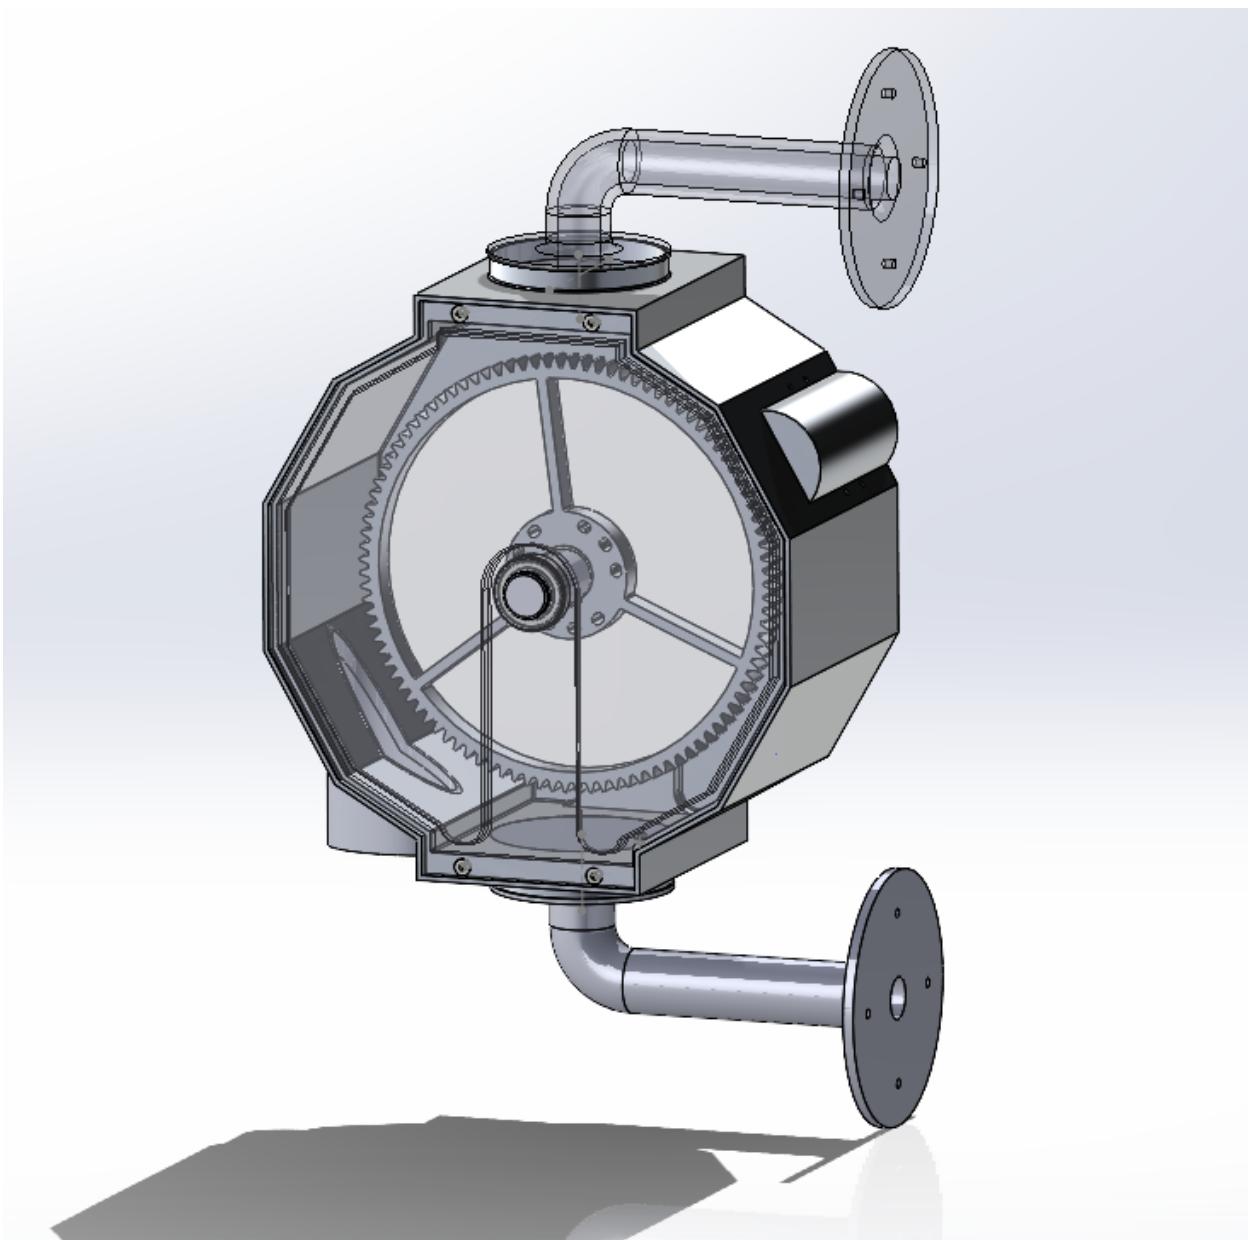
, Full Assembly with Cover and Top Arm Translucent.
